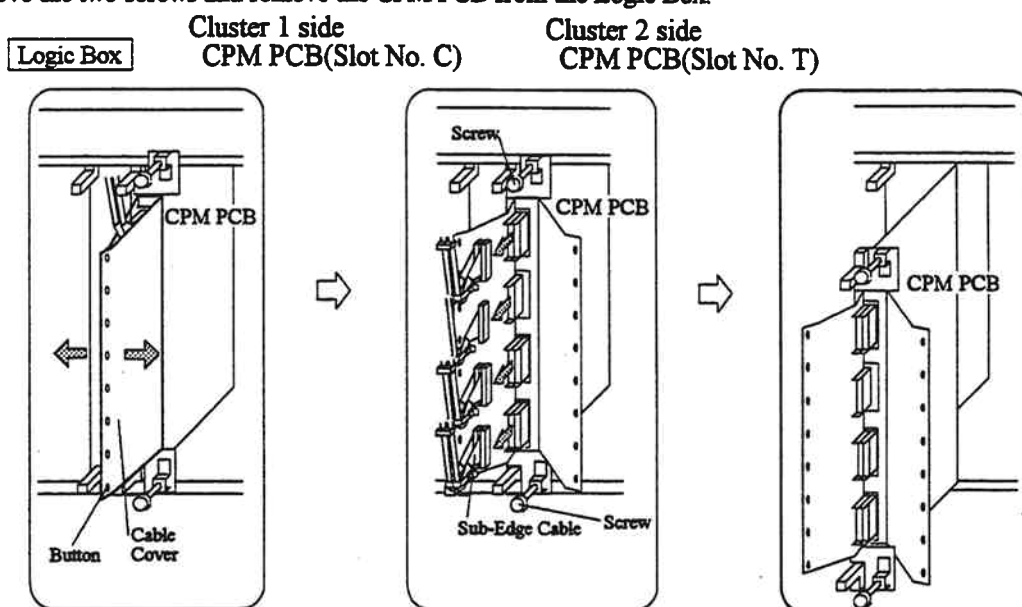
Removal of the CPM PCB
